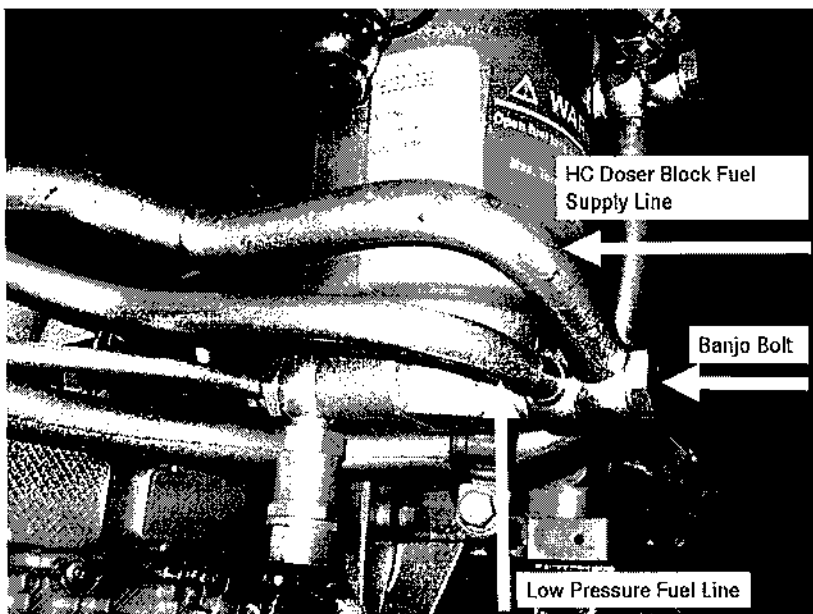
Fuel Filter Housing Banjo Bolt Removal (EPA07 Configuration)
